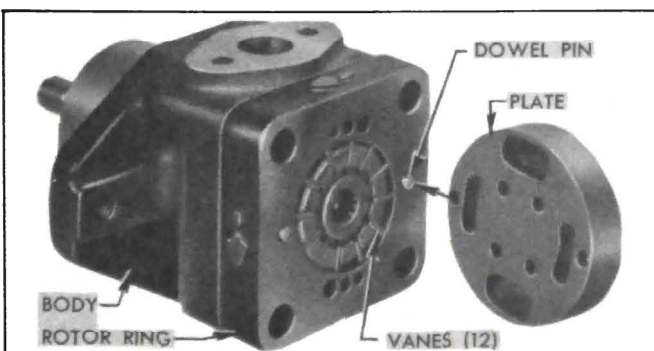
Pressure Plate, Ring, Rotor and Vanes
